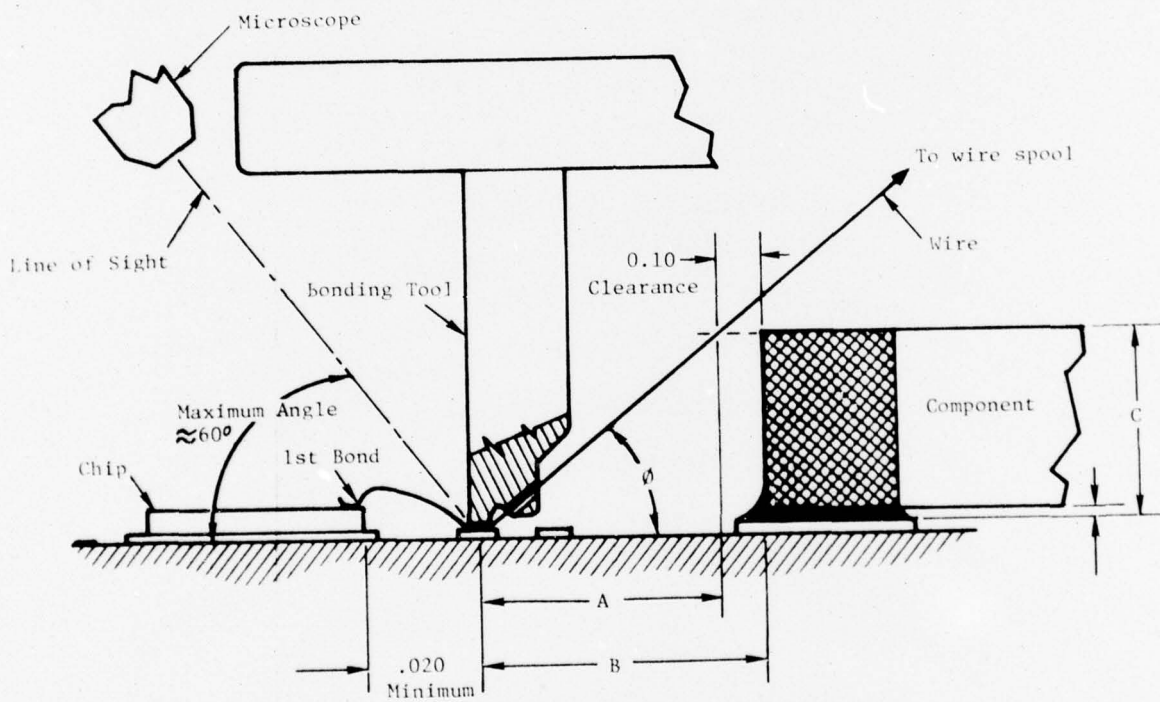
CLEARANCES REQUIRED IN FRONT AND BACK OF ULTRASONIC BONDING TOOL
